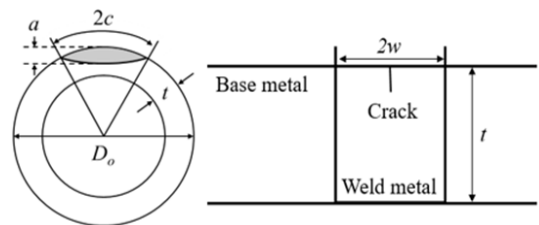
Schematics of cross-section for an outer surface cracked pipe and I-Groove girth welding configuration
